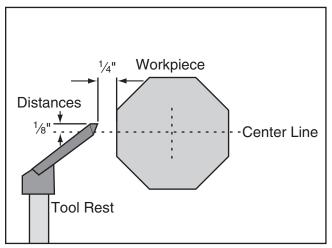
Tool rest set ¹/₈" above the center line and ¹/₄" away from workpiece.
